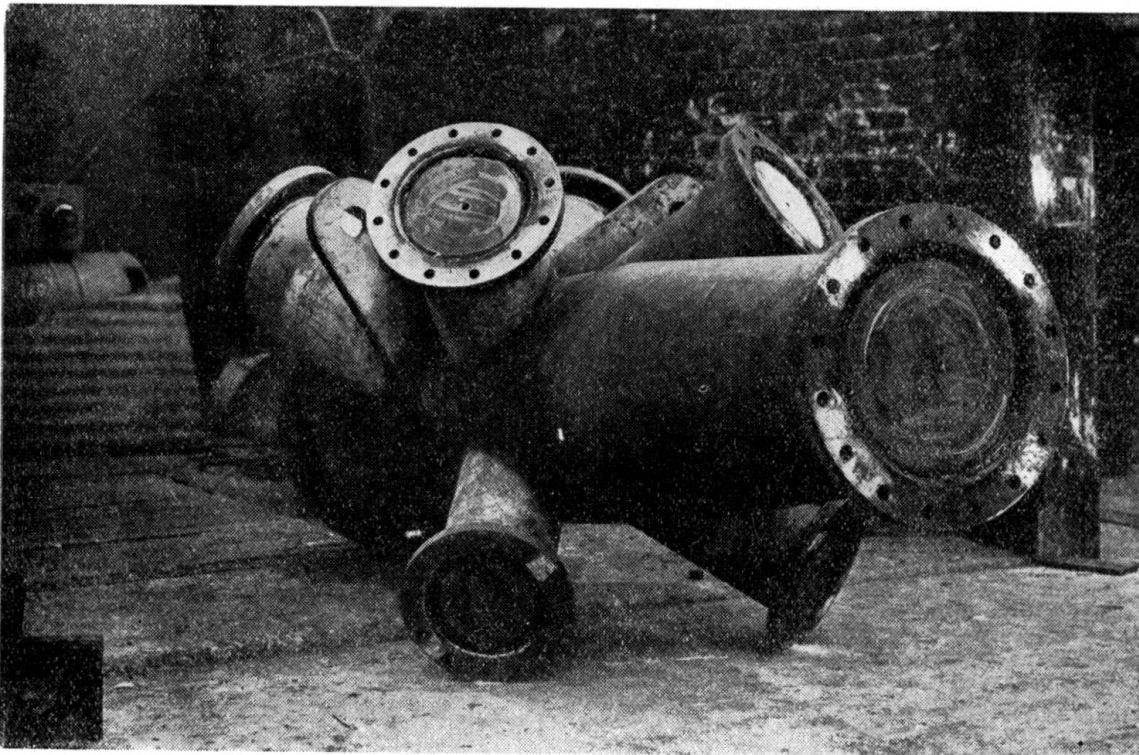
Junction piece ready for completion of welding on blanking-off plates
